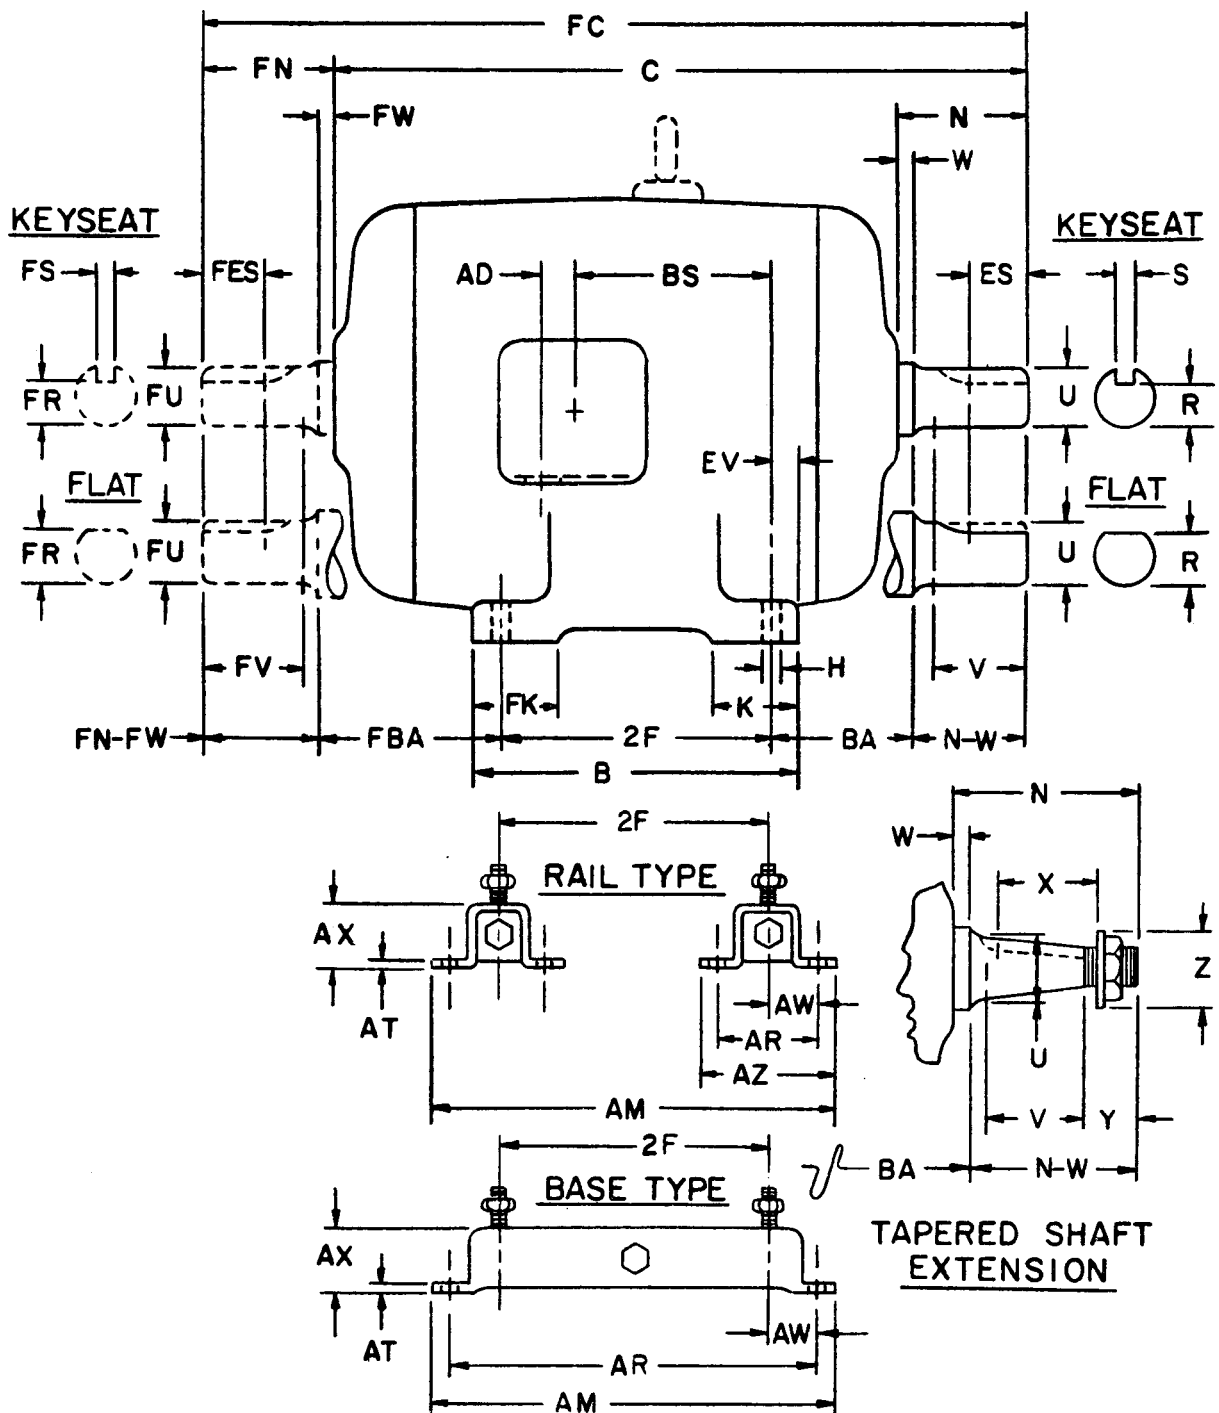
LETTERING OF DIMENSION SHEETS FOR FOOT-MOUNTED MACHINES —
